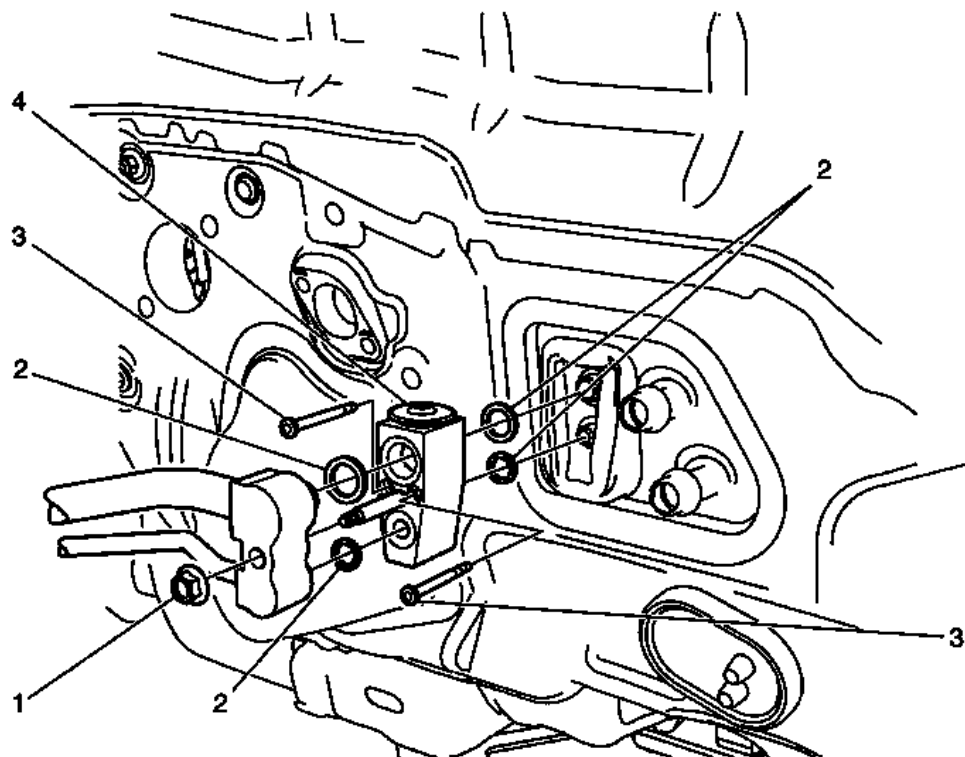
Air Conditioning Evaporator Thermal Expansion Valve Components
